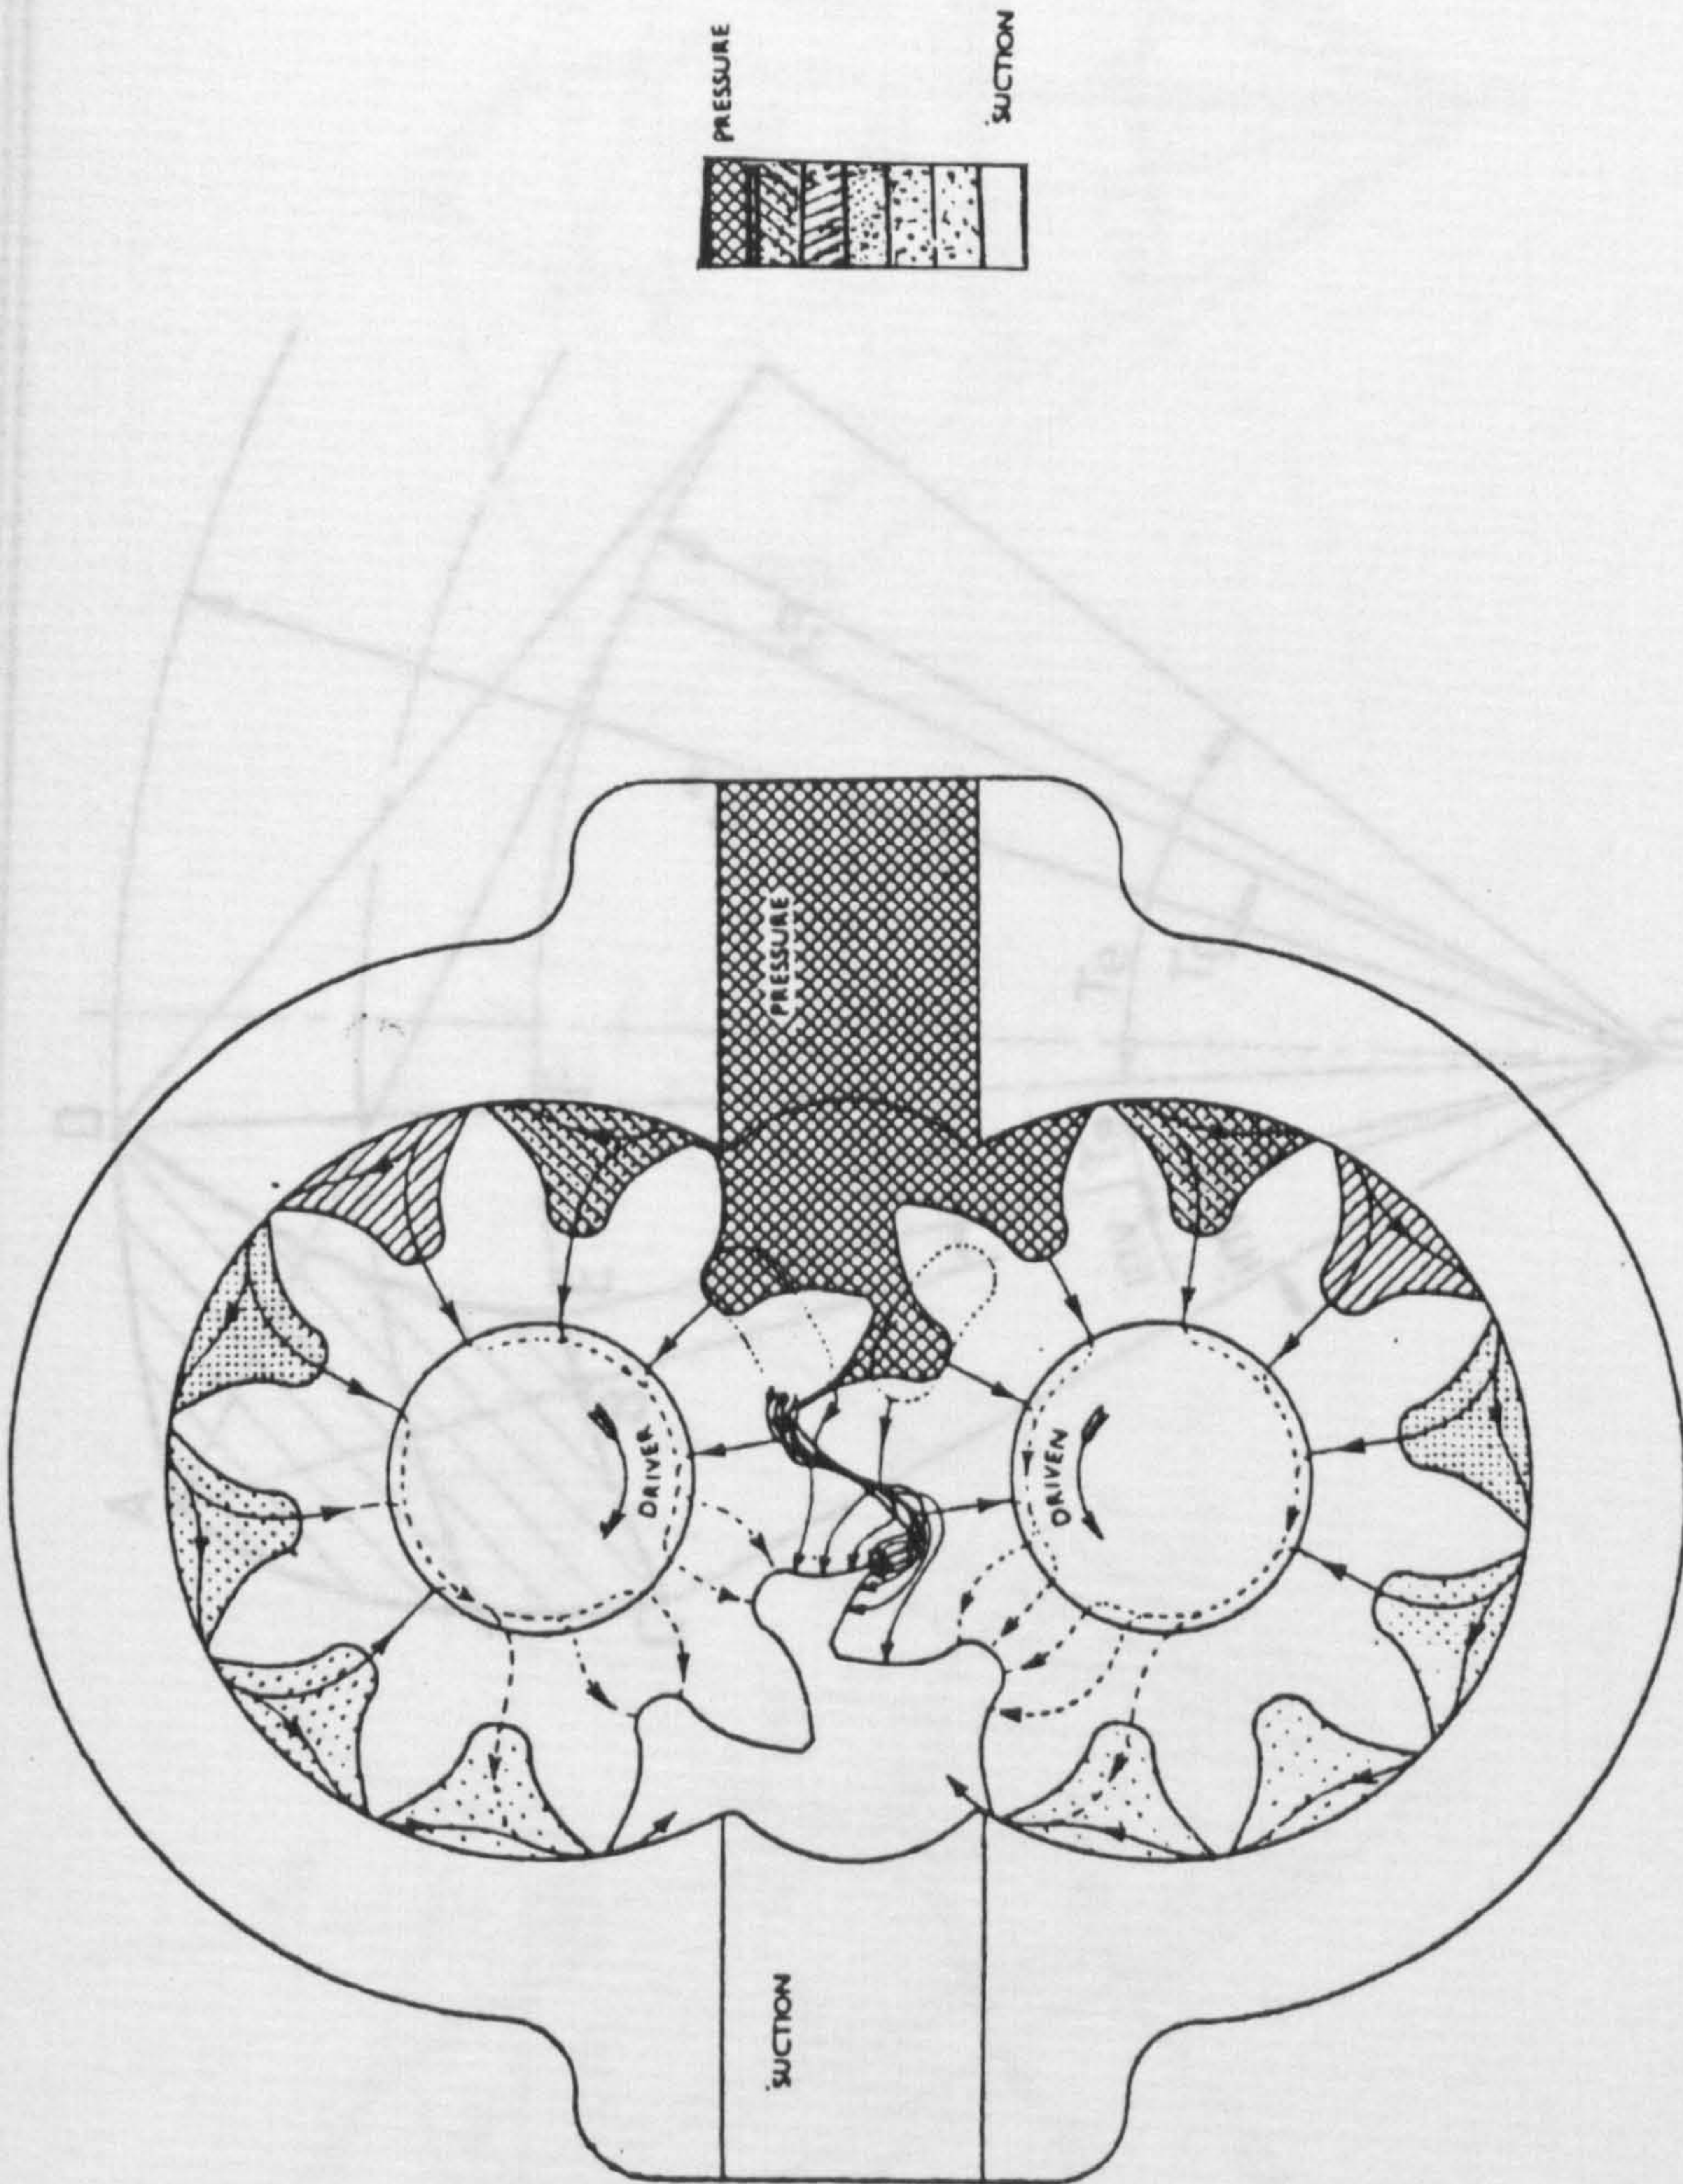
Diagram Showing the Internal Leakage Paths in a Gear Pump
